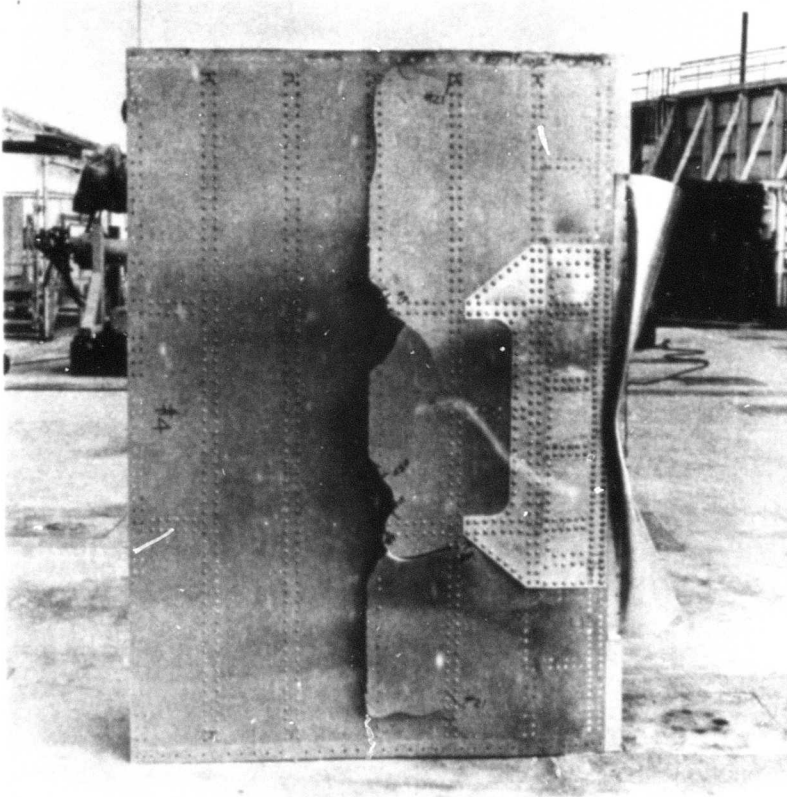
Complete Failure of Test Tank No. 4. The six popped rivets shown in Figure B-20 were replaced and a log impact series of tests was begun. This shows progressive failure resulting from Drops 19, 20 and 21. Initial skin failure was 2-in. crack at an aft end of third-bay intercostal. Max. impact load was 94,100 lb.
